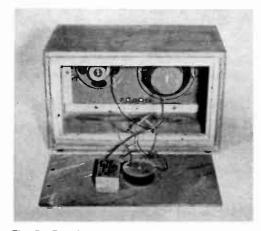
Completed cabinet ready for stuffing with fiberglass blocks. Mount choke with 2½-in.-long machine screw. Cement electrolytics with epoxy.
